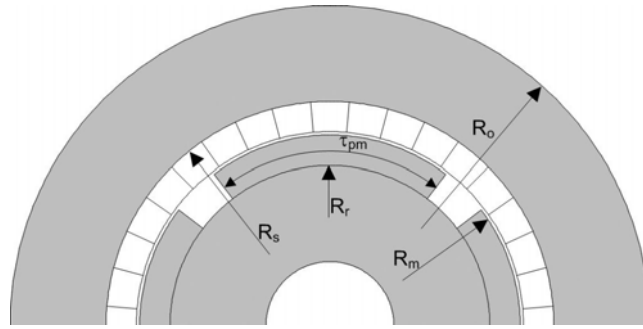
Characteristic dimensions for a slotless SPM machine.
